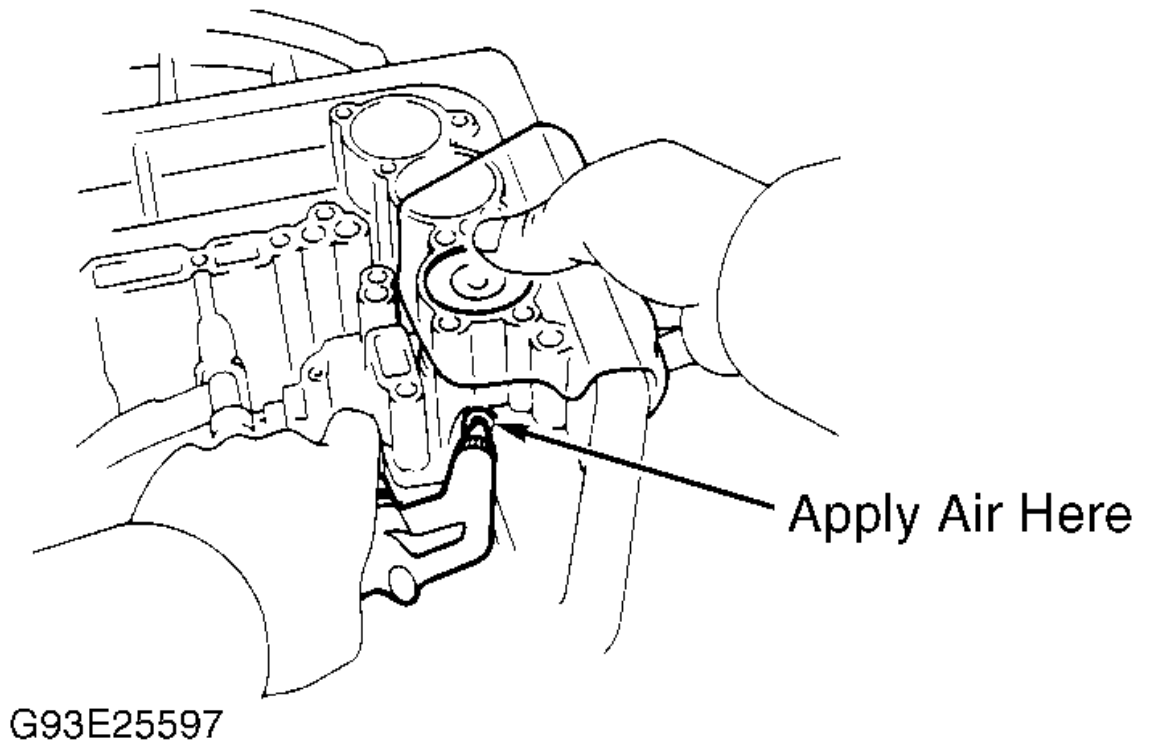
Removing 2nd Brake Accumulator Piston & Spring
